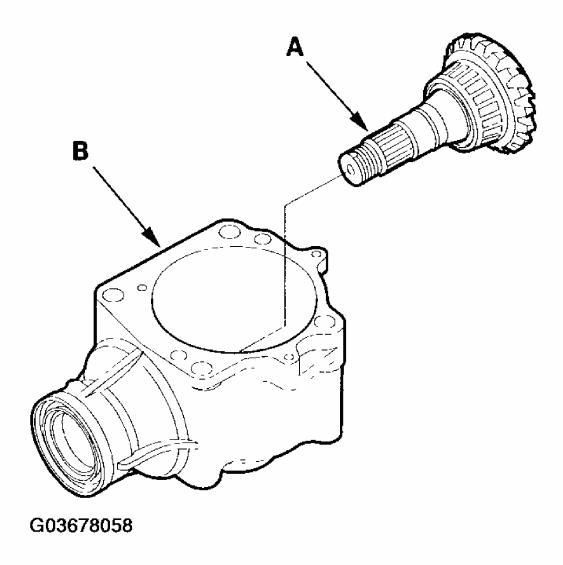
Installing Transfer Driven Gear In Transfer Housing Courtesy of AMERICAN HONDA MOTOR CO., INC.
